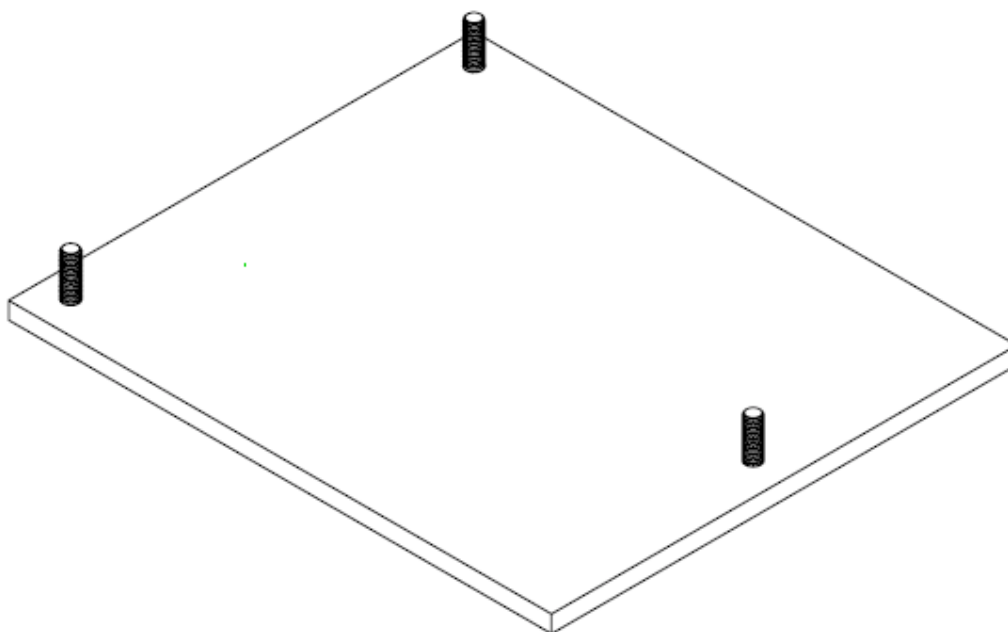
Mounting plate with welded screws that can hold the PMT support structure.
